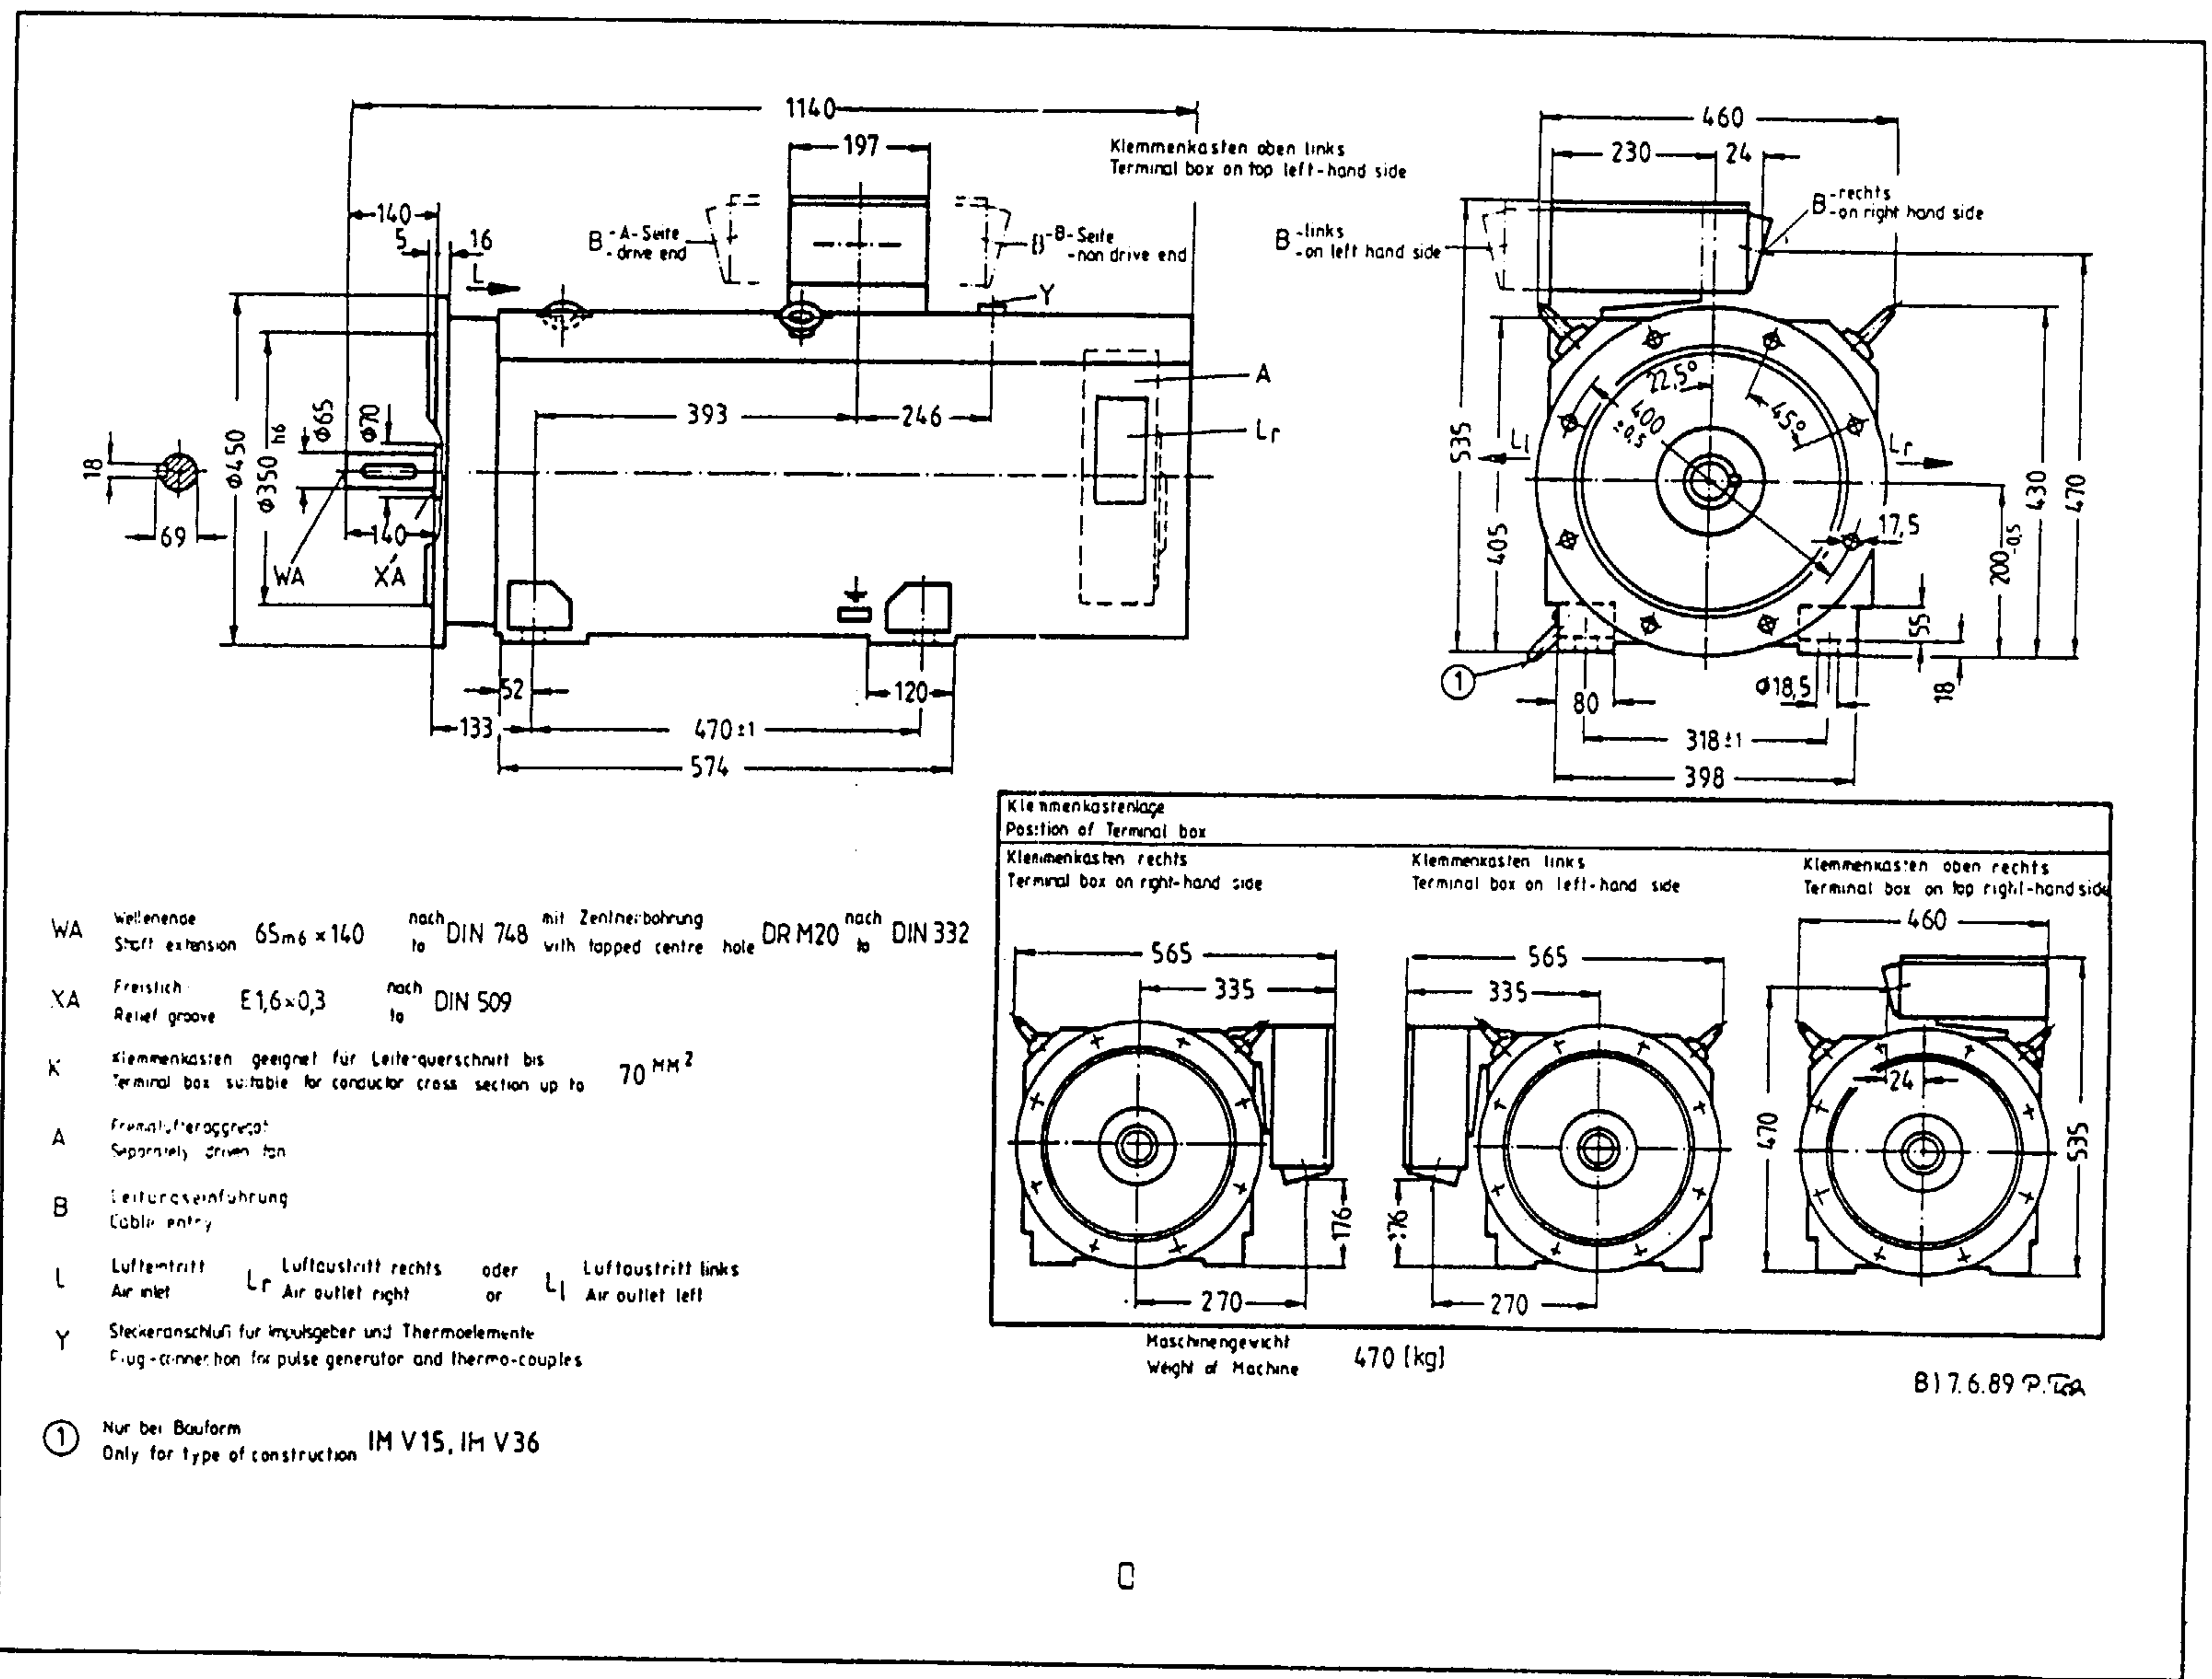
Dimension sheets for 1PH6 206-4C AC motors, type of construction IM B3 (dimensions in mm, not to scale)
